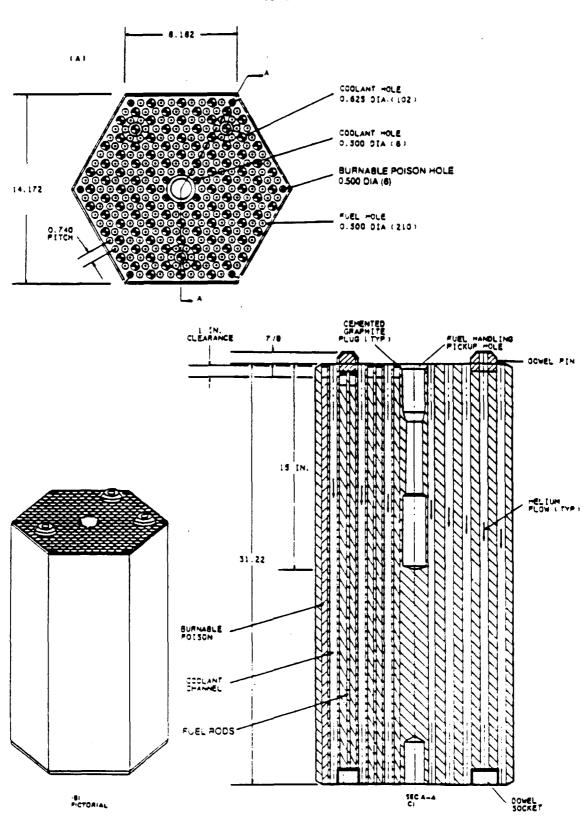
C.3. Standard fuel element with enlarged pickup hole.
